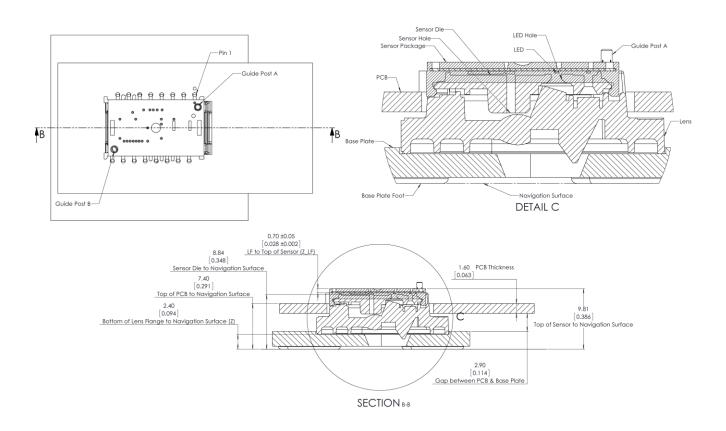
Assembly drawing of PMW3360DM-T2QU and distance from lens reference plane to tracking surface (Z)
